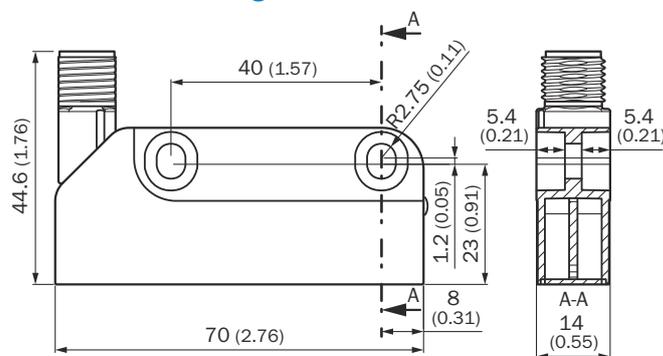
Dimensional drawing STL/ETL70 with M12 male connector (all dimensions in mm (inch))
